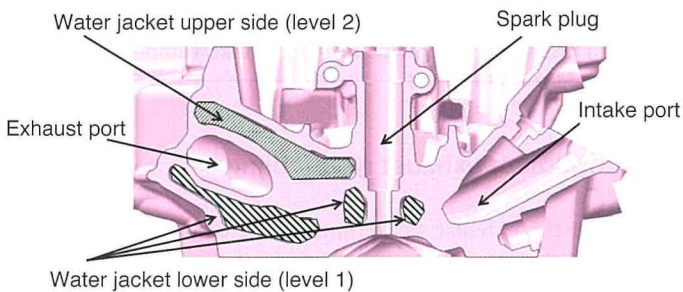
Right Bank Side of Cylinder Head (Fig. 15 View B)
